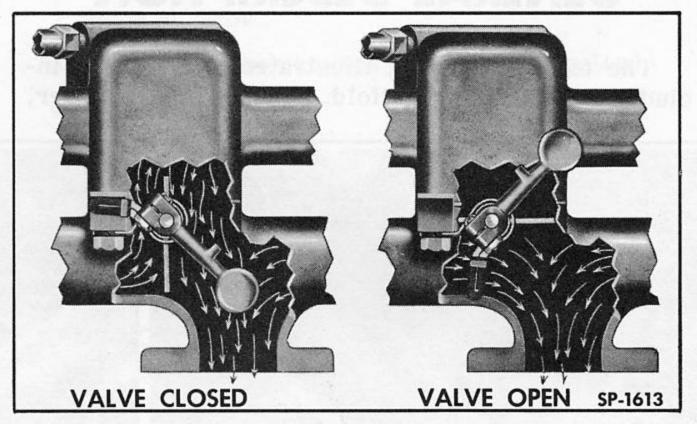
Operation of Manifold Heat Control Valve (6 Cylinder Shown)
